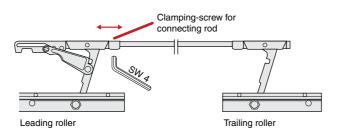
Adjust by loosening / tightening the clamping screw on the leading roller positioned on the bottom rail
